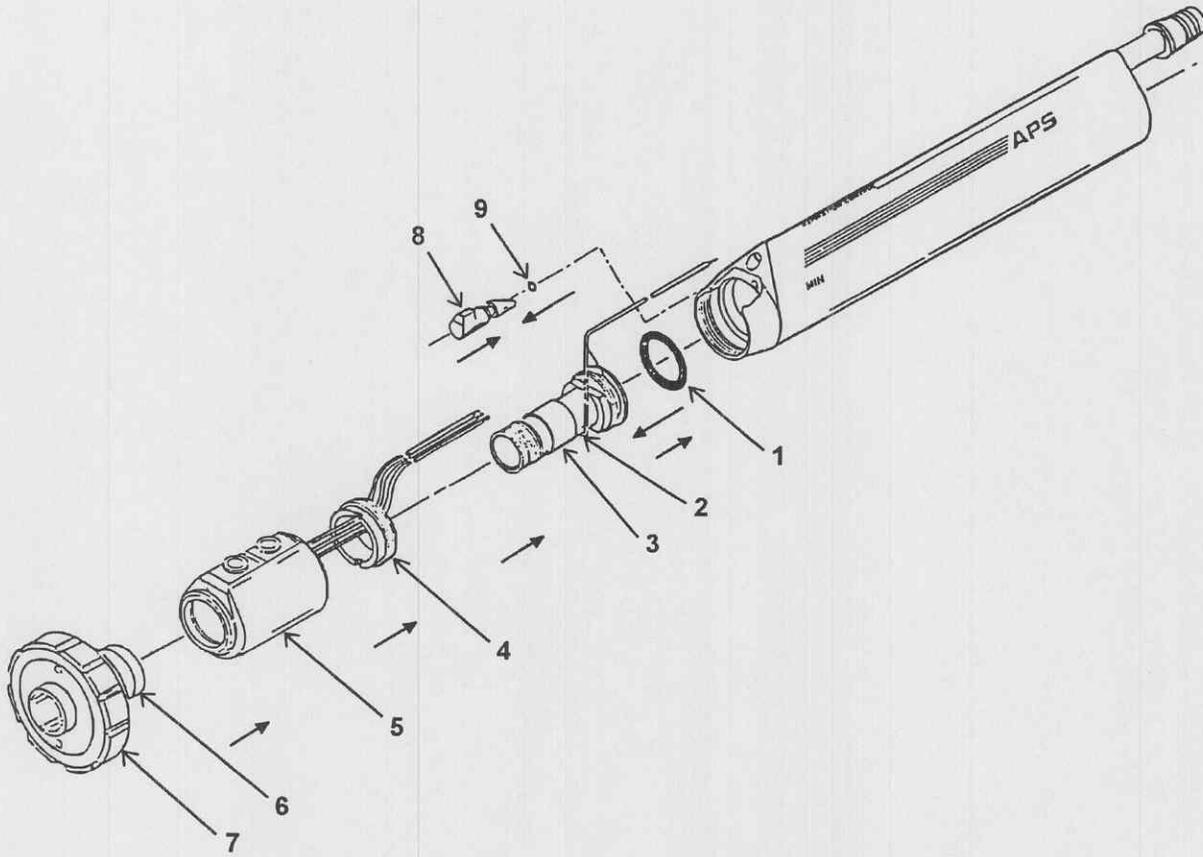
Handpiece trigger and nosepiece disassembly/assembly.
